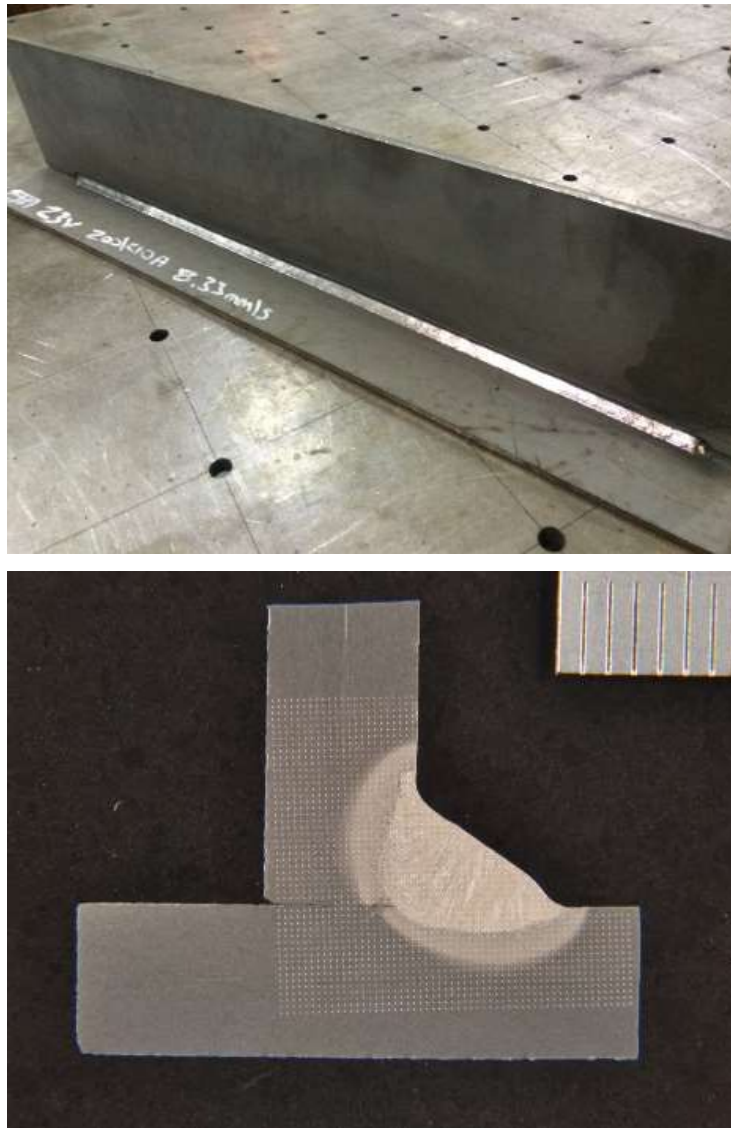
Pictures of a fillet welded structure and cross sectioned macrograph of a fillet weld
